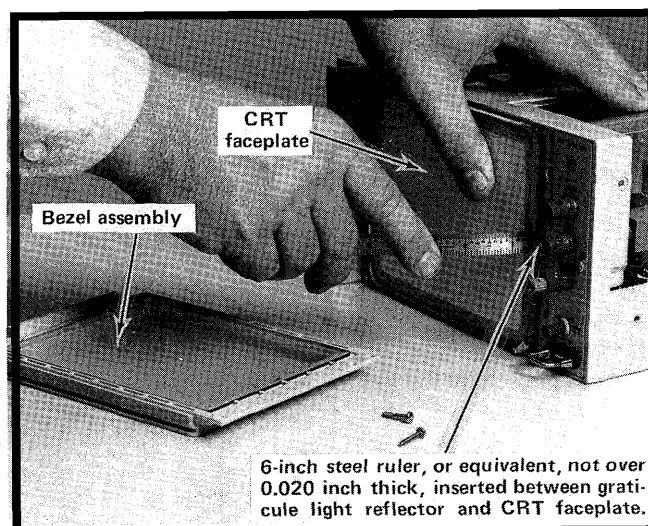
Illustration showing equipment and method used to correctly align light reflector with CRT faceplate.
